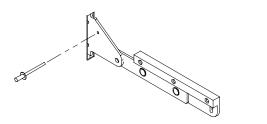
Insert Rivet/Screw/Nail to Keep Hinge Open
